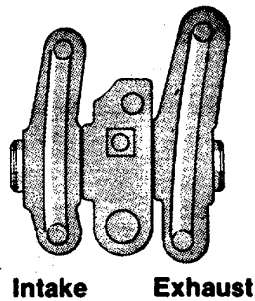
Intake and Exhaust Rocker Lever Location
